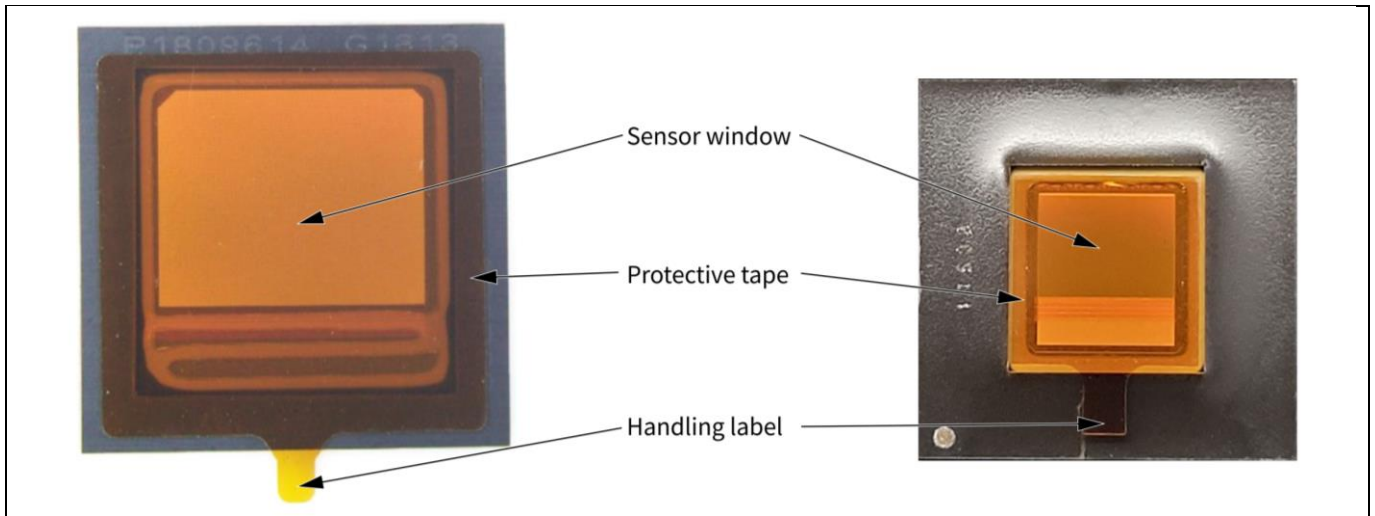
Photographs of the two types of optical sensor LFBGA package with protective polyimide tape for sensor glass protection during handling and board assembly.
